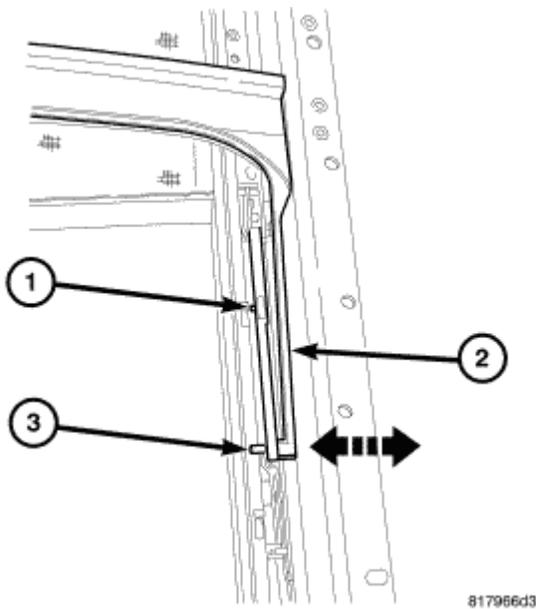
Separating/Installing Trough Pins From Glass Lift Mechanisms
